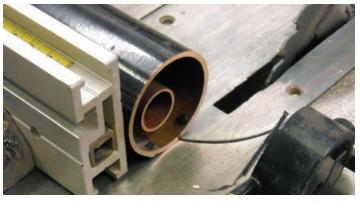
The rear of the 'Ruby' boiler is cut off on the table saw with a metal cutting blade.
